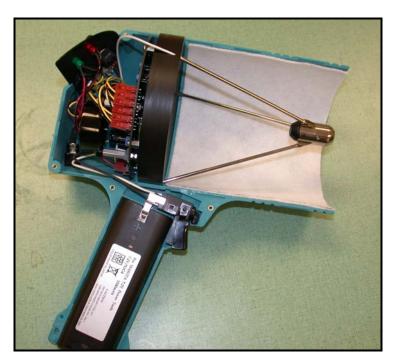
Side view of CWD-2002 with right housing removed to show placement of the electronic circuit board, collimating dish and transducer/laser pointer assembly.
